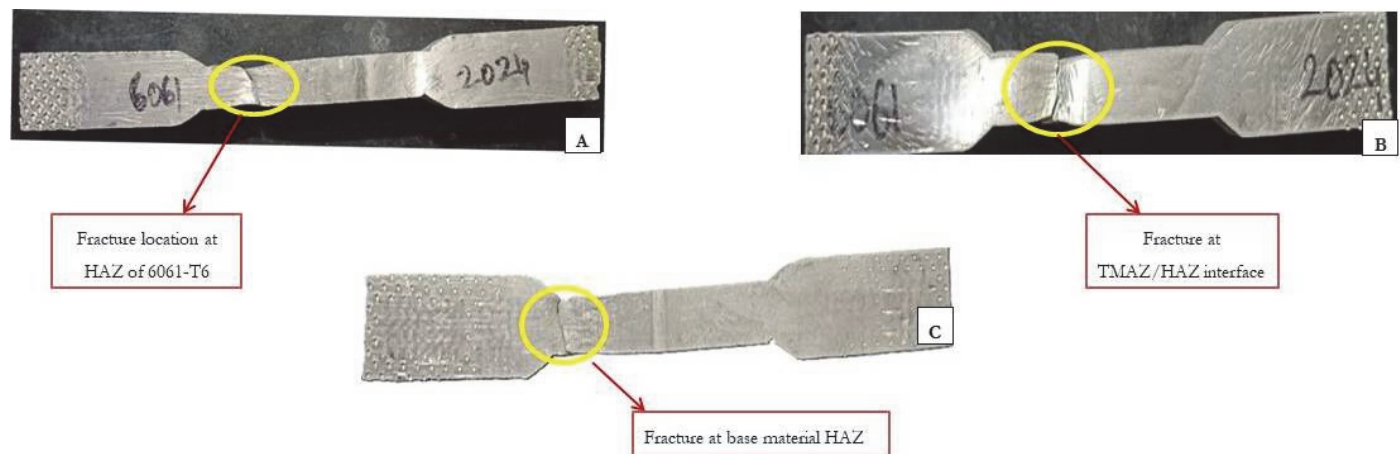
Fracture locations in tensile specimens showing (a) Sample 1 (600 rpm, 25 mm/min) - fracture in HAZ on AA 6061 side, (b) Sample 5 (700 rpm, 30 mm/min) - fracture at TMAZ/HAZ interface, (c) Sample 9 (800 rpm, 35 mm/min) - fracture in base material near HAZ.
